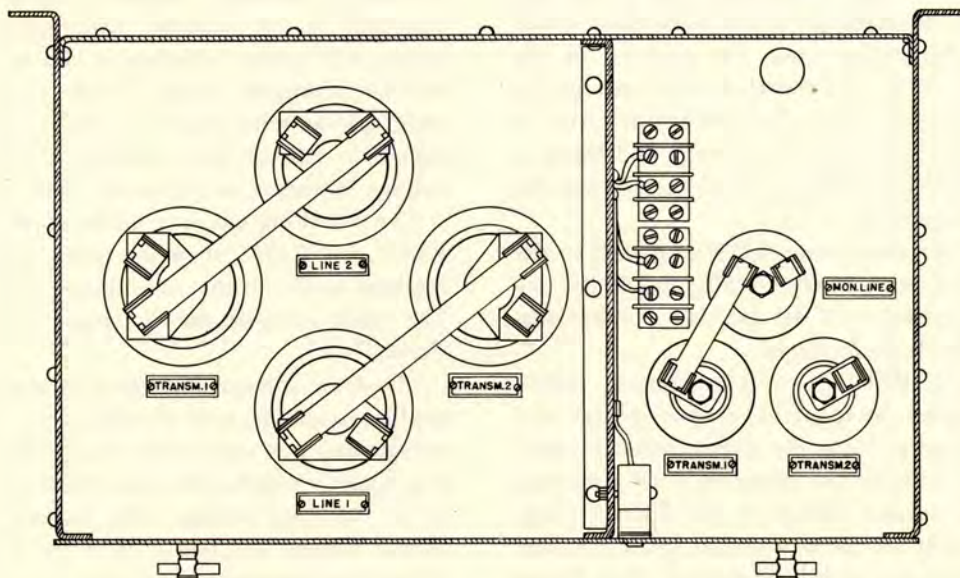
Plan View of Terminal Box Type J-455A/FPN
